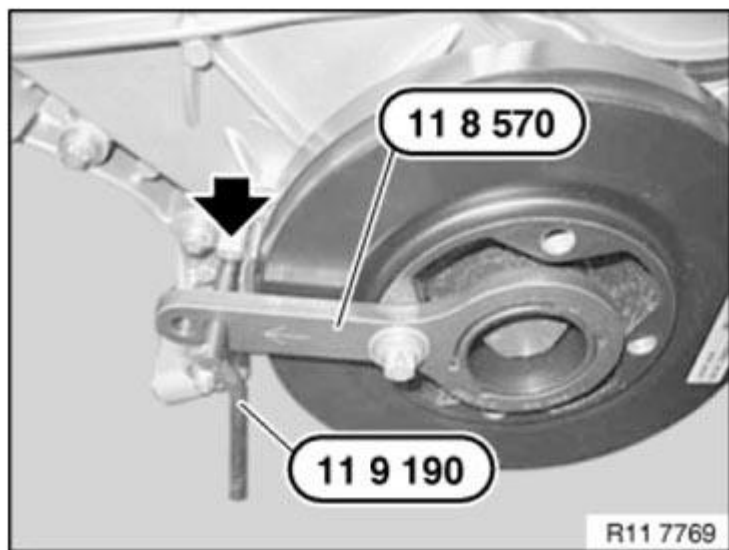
Securing Vibration Damper With Special Tool 11 9 190
